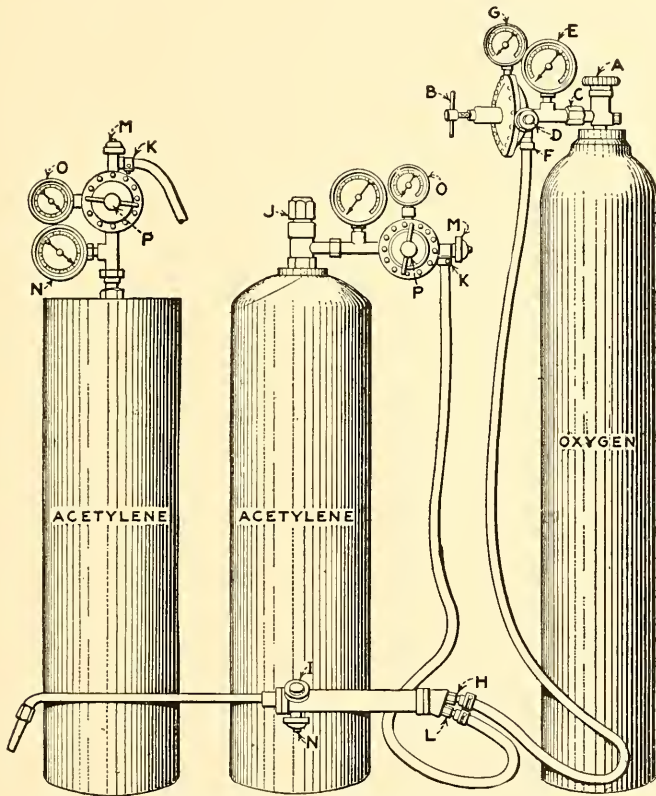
Imperial Welding Outfit Connected to Tanks.
